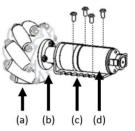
Mecanum wheel (a), mounting hub (b), motor bracket (c), and direct current motor (d).
